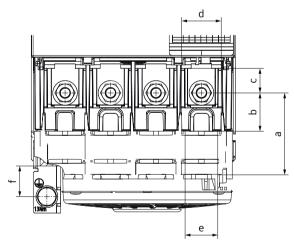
Dimensions of the line connection block of the Smart Line Modules 36 kW and 55 kW
